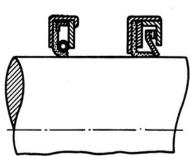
Left, Chicago Rawhide Company seal. Right, Gits Brothers Manufacturing Company seal. They can be used for sealing in either direction, the spring maintaining pressure between the leather and the shaft.
